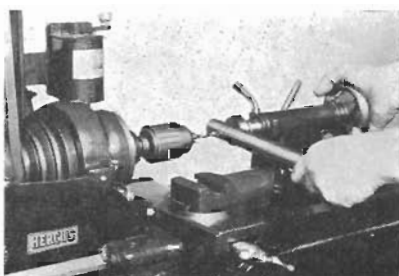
Drilling a cross hole in a Shaft supported by the Crotch Centre
